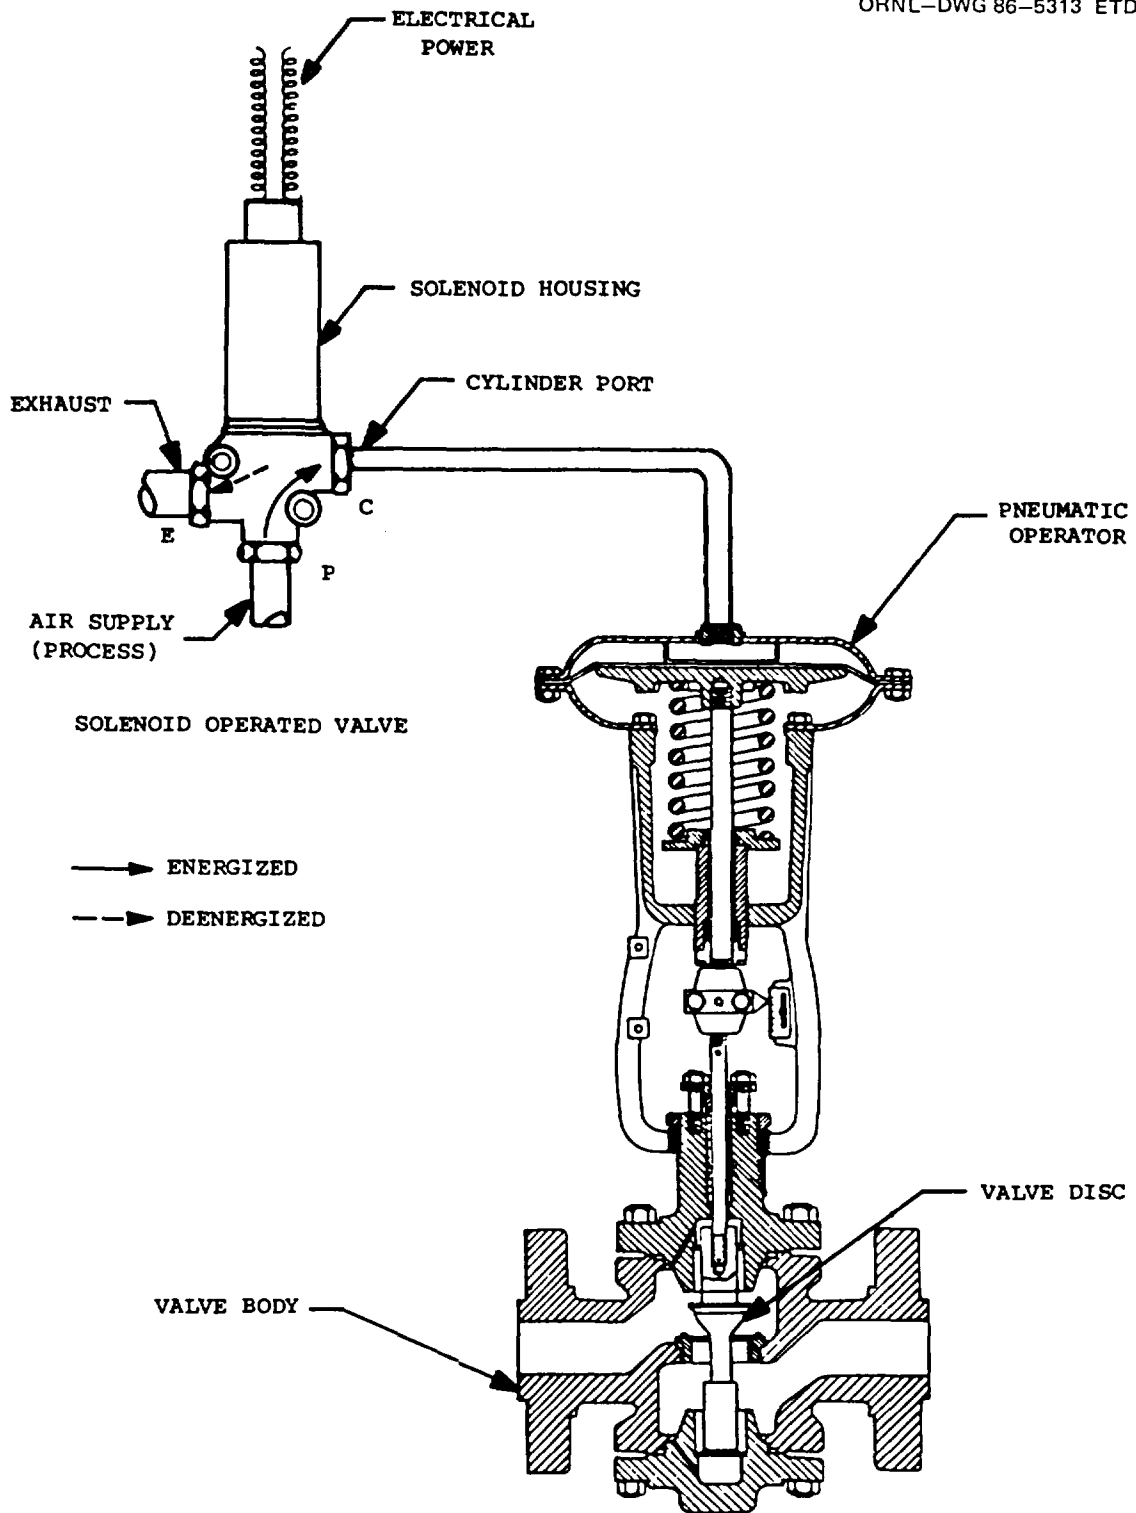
Schematic diagram of three-way SOV (refer to Fig. 8 for sectional view) used to control a pneumatically actuated valve.
